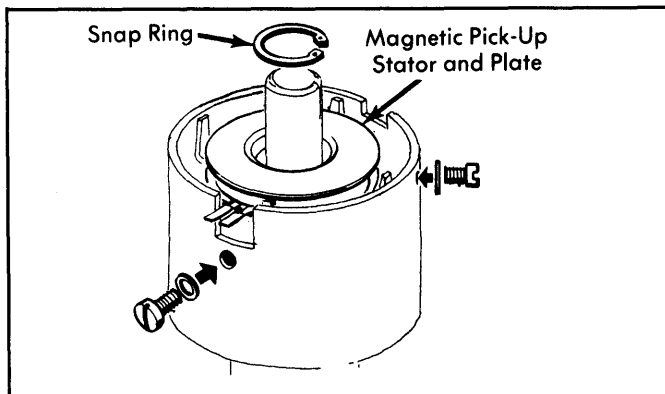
Removing or Installing Pick-Up, Stator, & Carrier Plate
